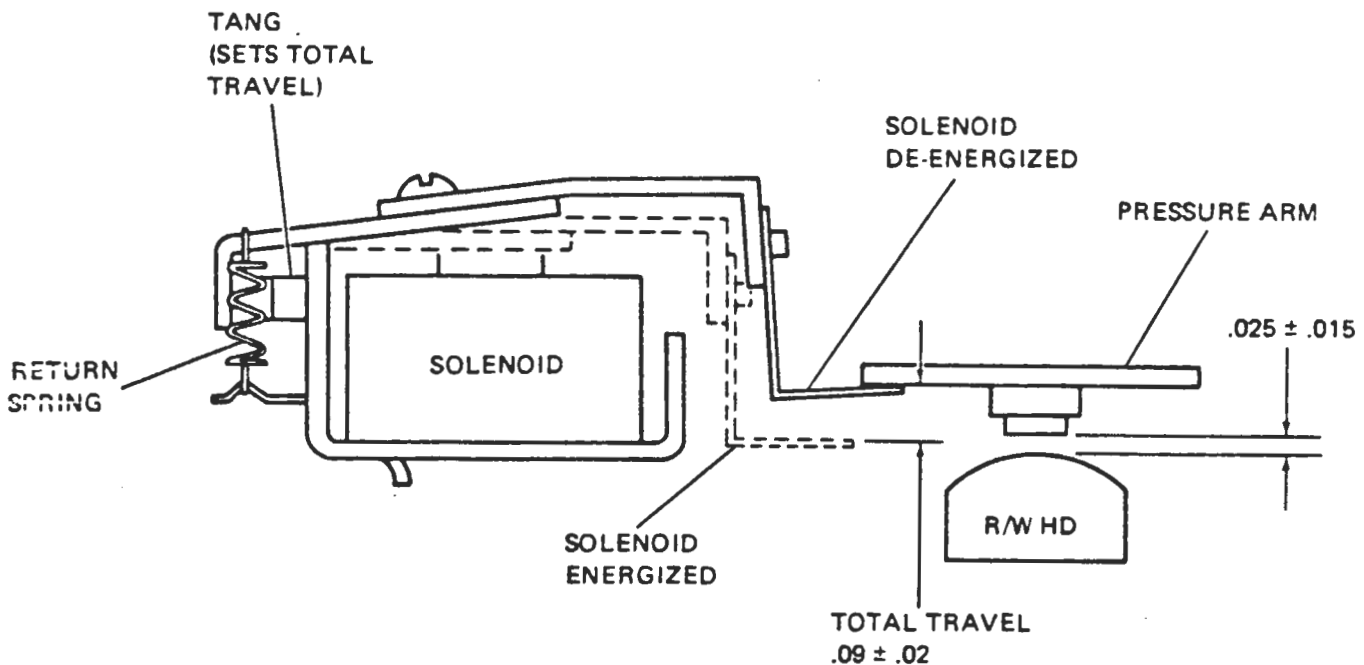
Head Load Check and Adjustment (Side Ø)
